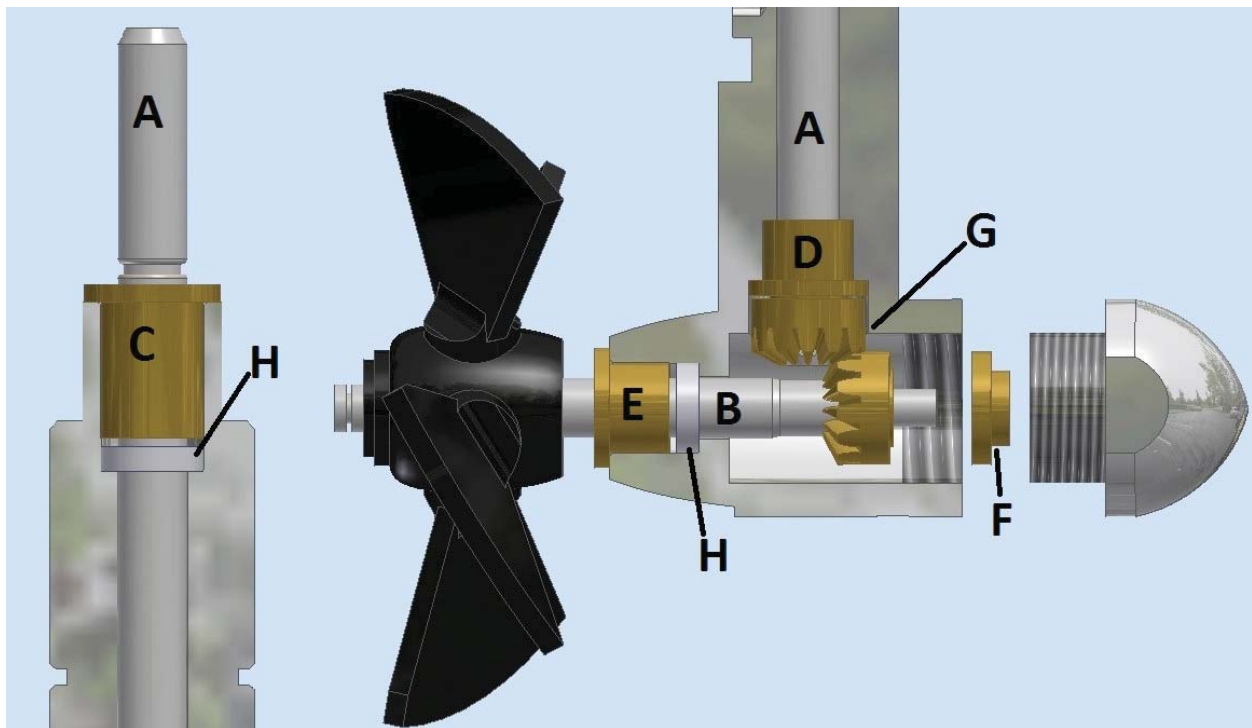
Lower Housing Internal Components. This figure shows a cut away of the lower housing revealing all internal components.
